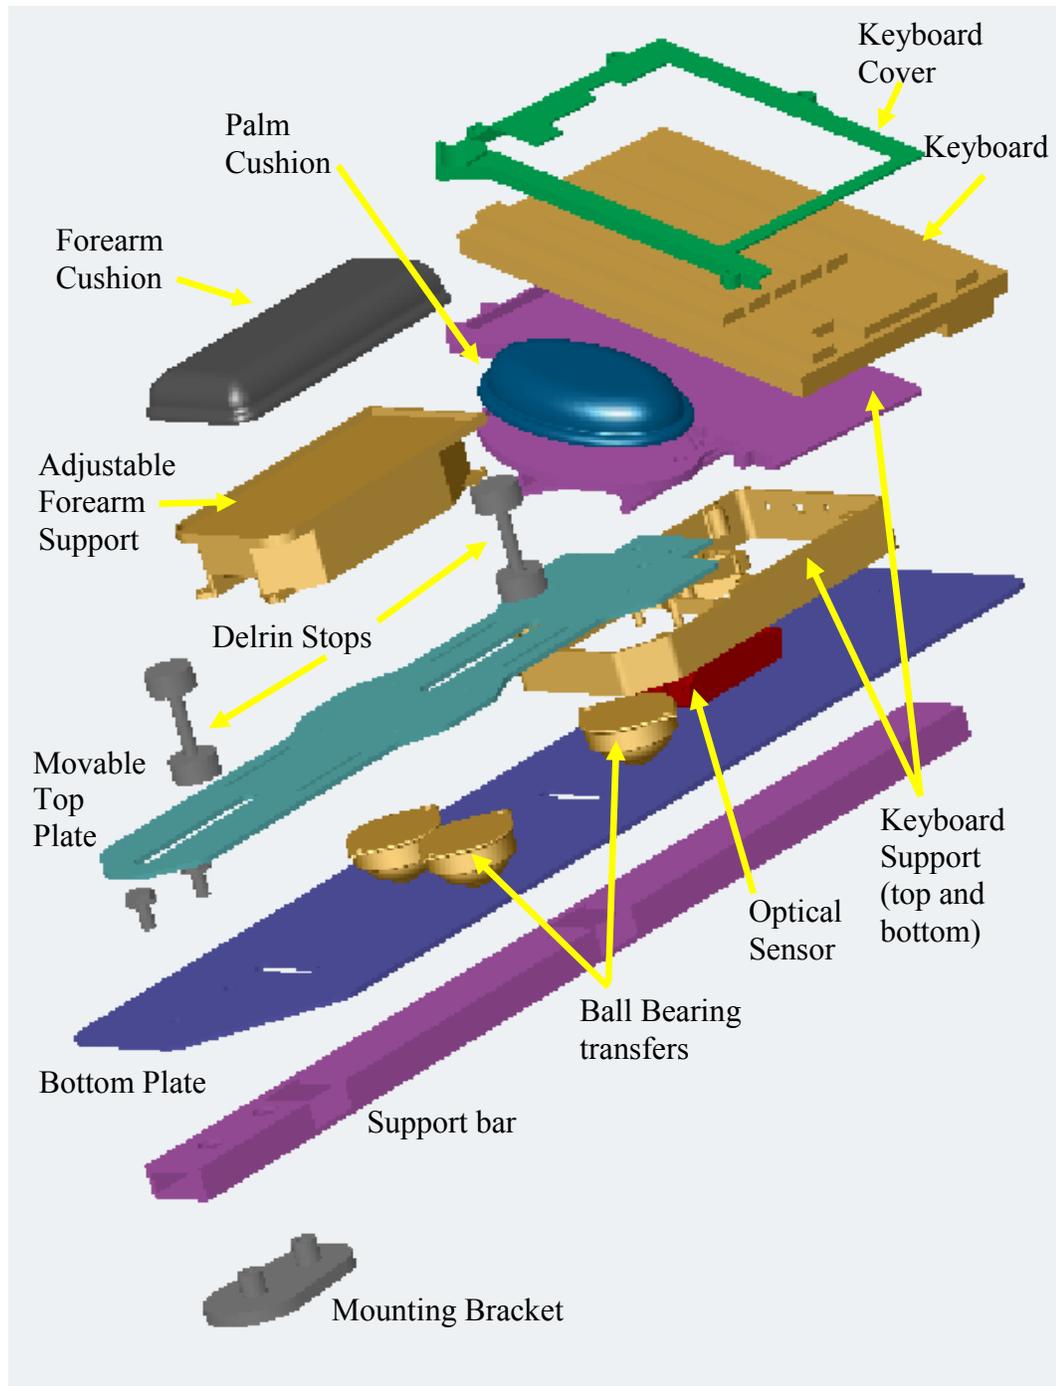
Exploded View of the Command Chair Solid Model (Right Side)
